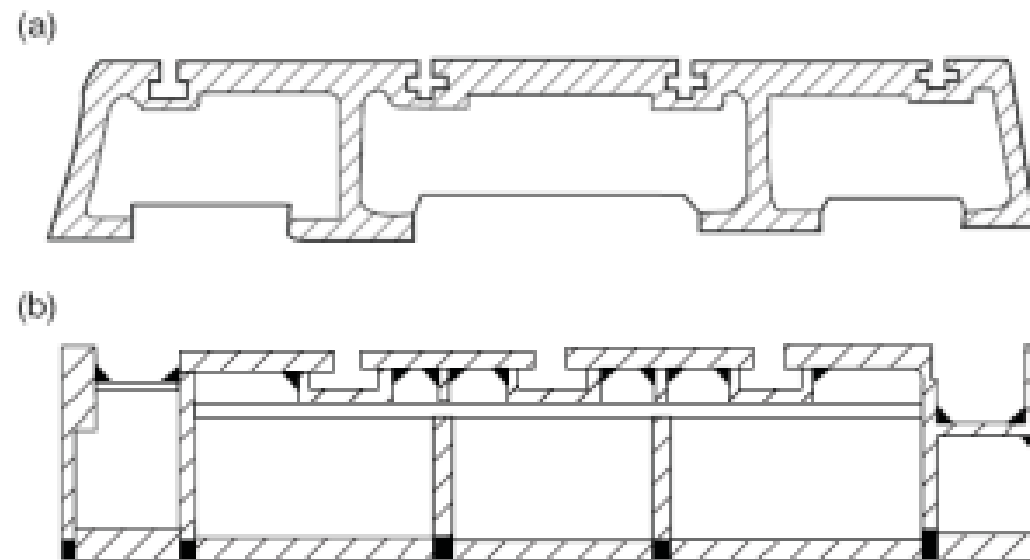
Cast and fabricated structures: (a) cast and (b) welded machine tool bases.
